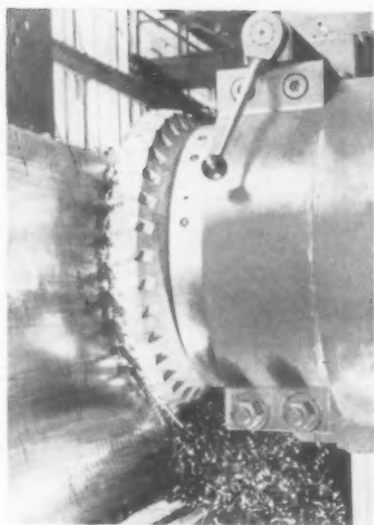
, at left, shows carbide milling of die blocks having a hardness of 300-375 Brinell with a 24 in. face mill mounted on an openside miller. With this carbide-insert cutter, cuts 22 in. wide are taken at high surface speeds and high feed rates.
